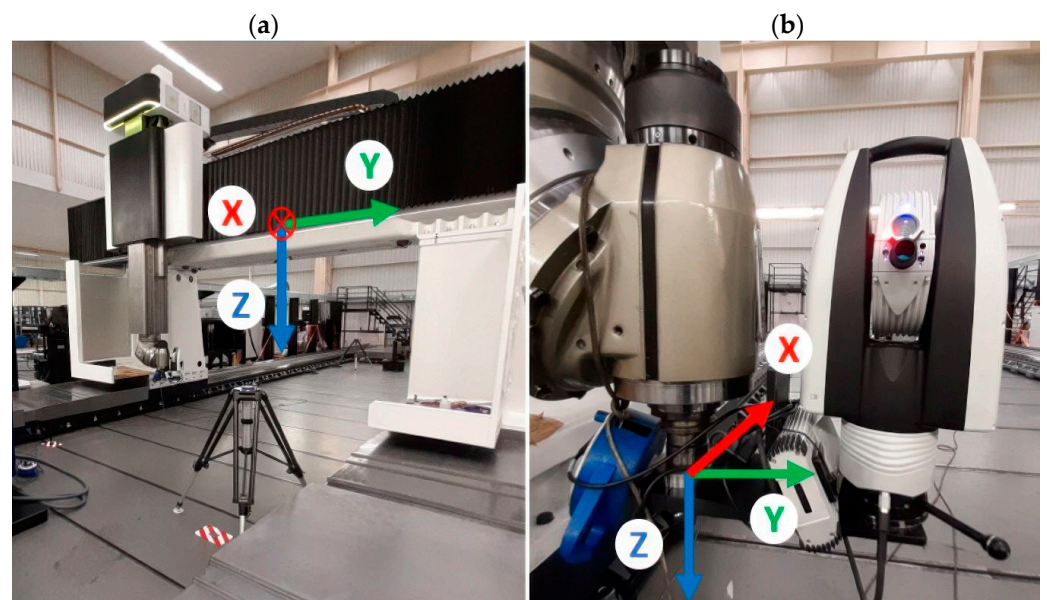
THERA™ machine tool axes definition: (a) general view of the machine tool and (b) laser tracker on the tool holder.
